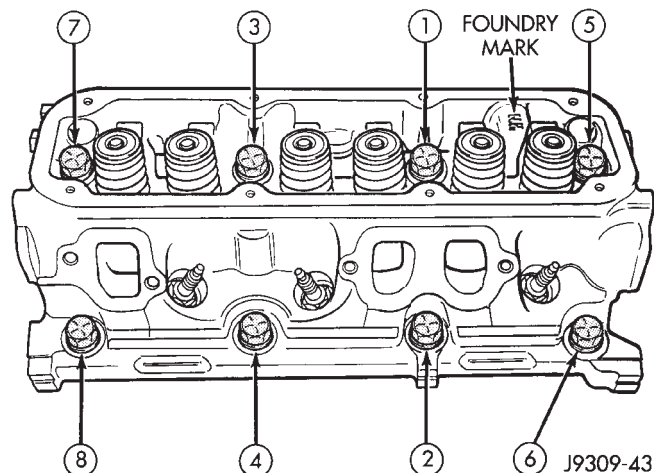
Cylinder Head Bolt -Tightening Sequence
